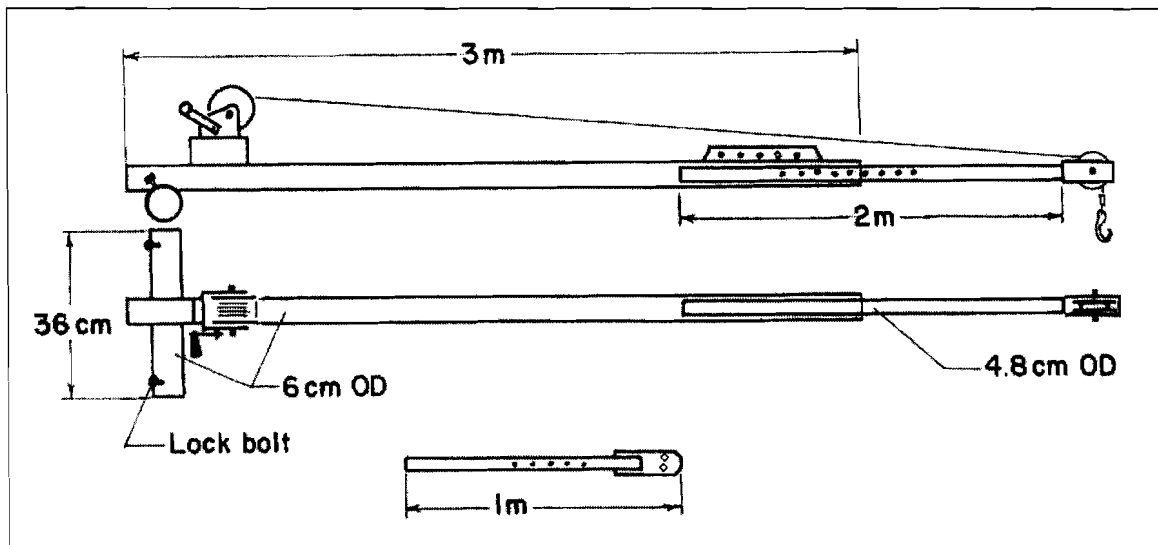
Installation boom and winch used to add or remove sections of the Sectional Fish Deflection Weir. The top and middle drawings are a side and top view respectively. The bottom drawing shows a drop-in pin used to support the boom during deployment.
